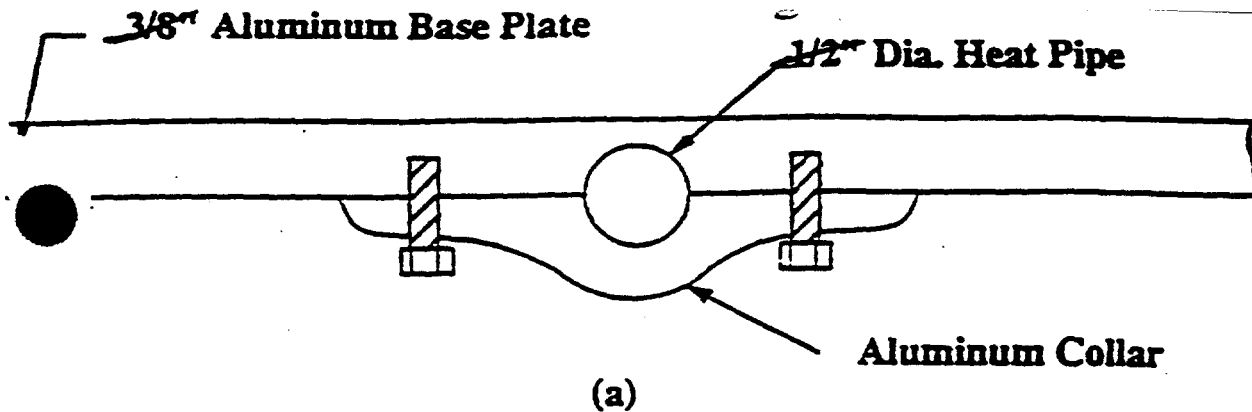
Schematic of drawer level cooling pad; direct coupling to header heat pipe.
